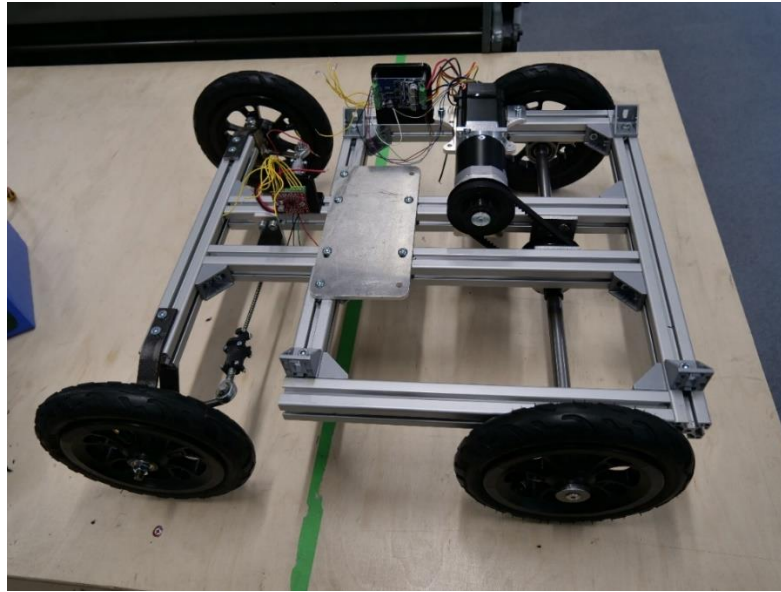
Assembly of the first prototype robot (JHC team, 2020, p. 8)
